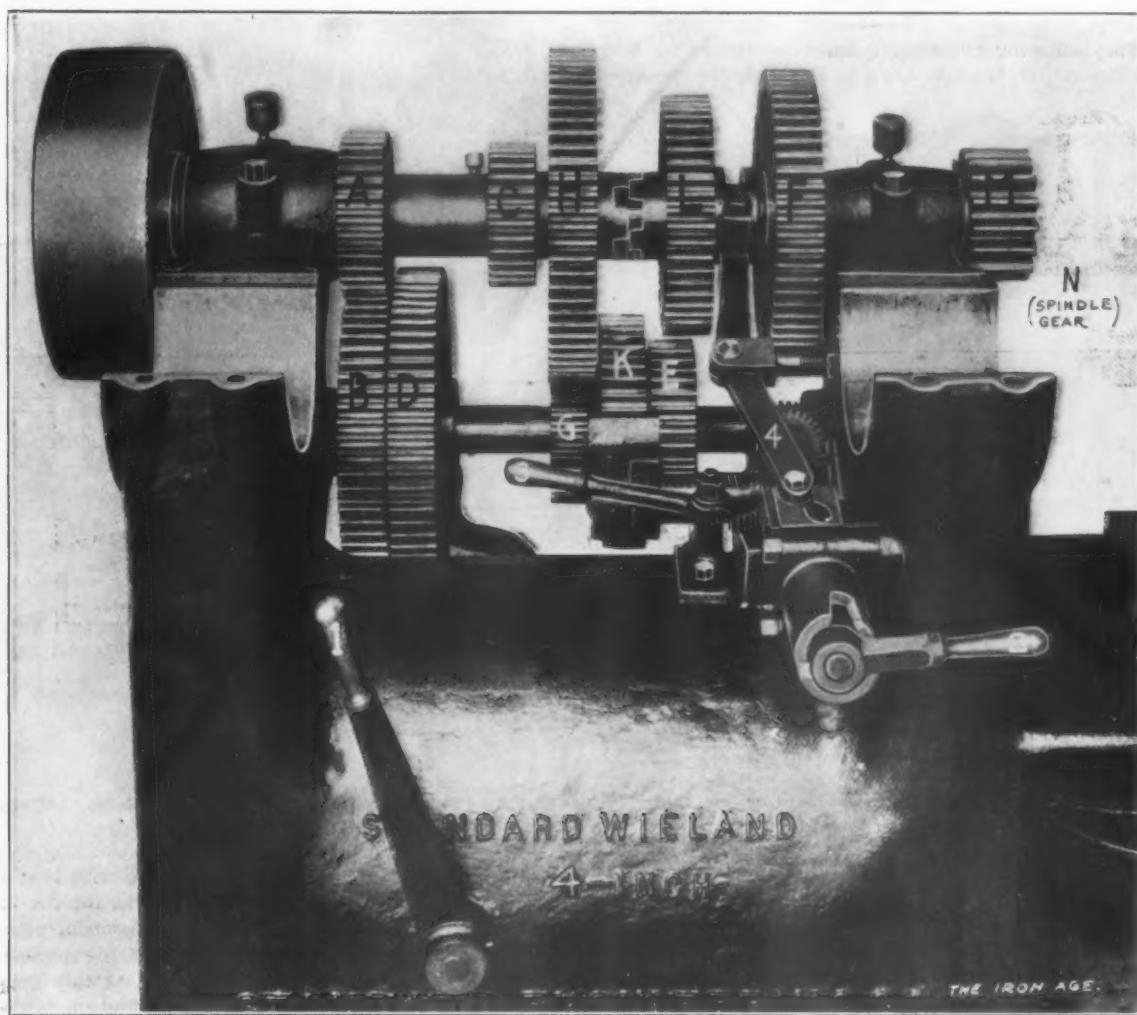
A View of the Head with the Main Spindle Removed to Show the Gearing
